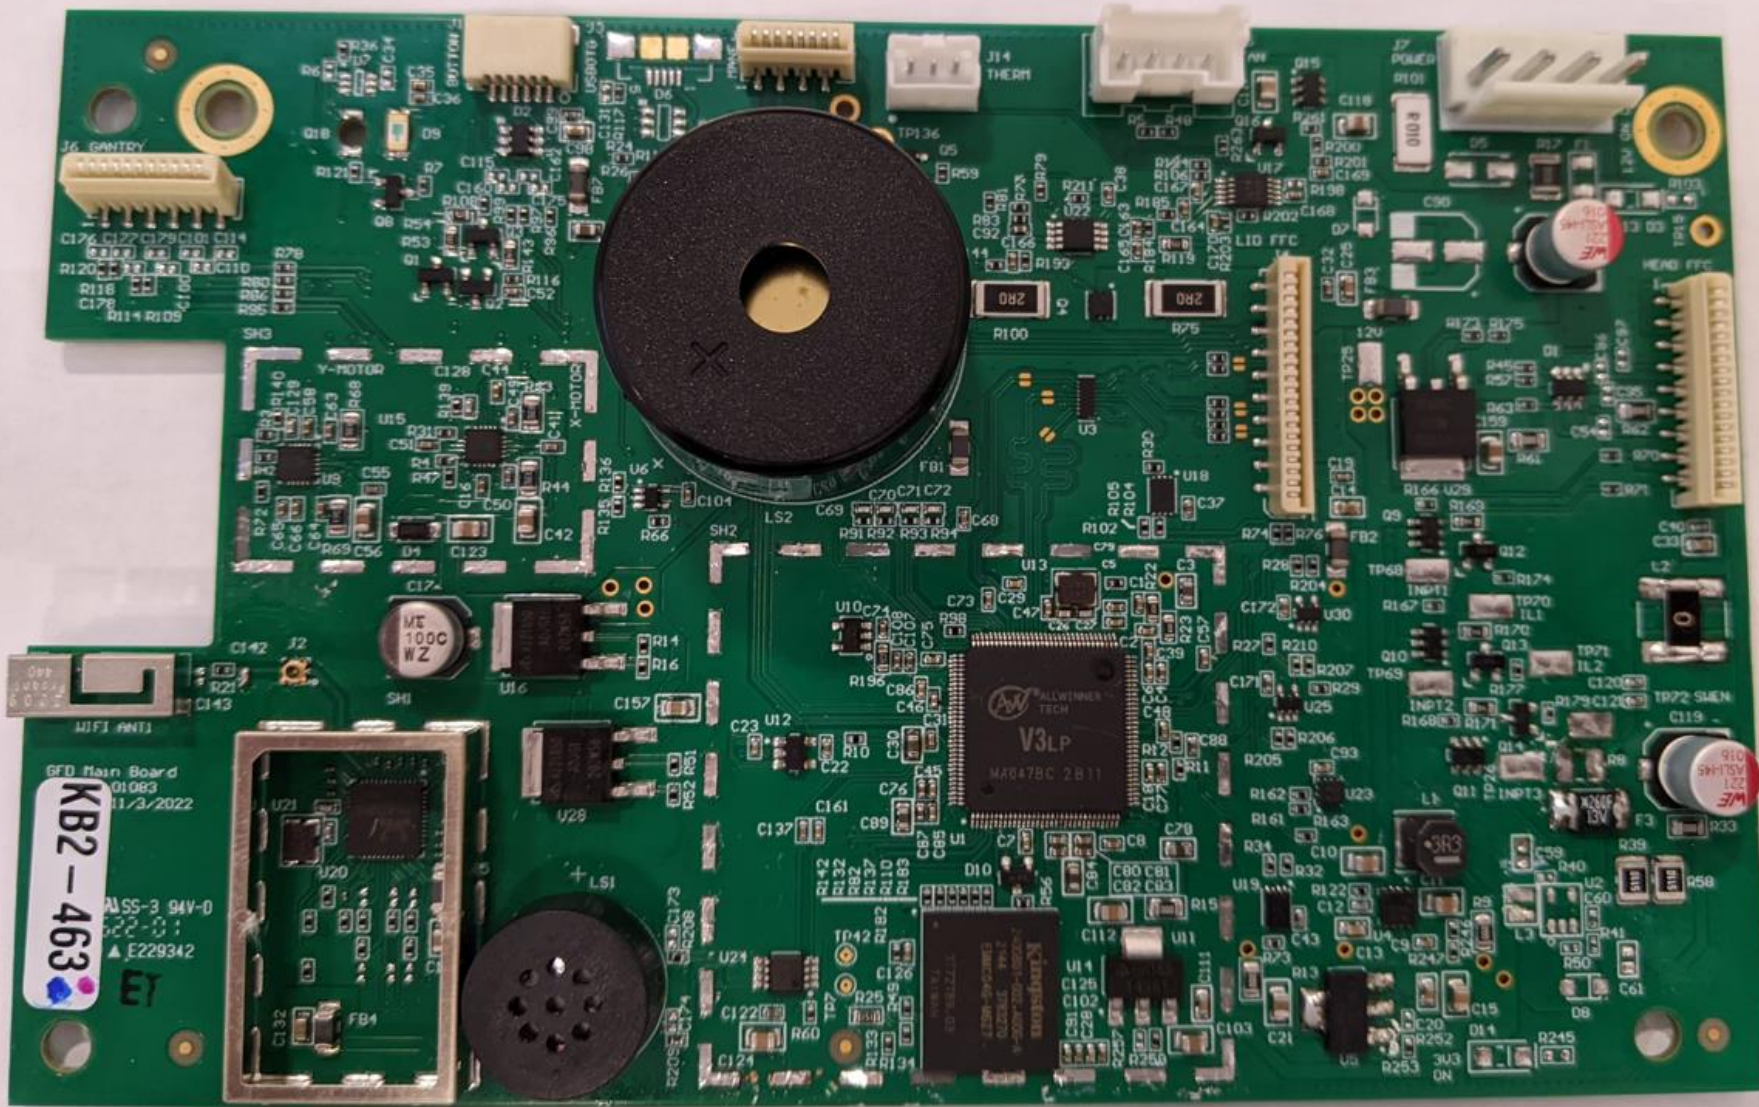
GF-PCA-00155- Control PCBA Top Side with EMI Shield uninstalled.
